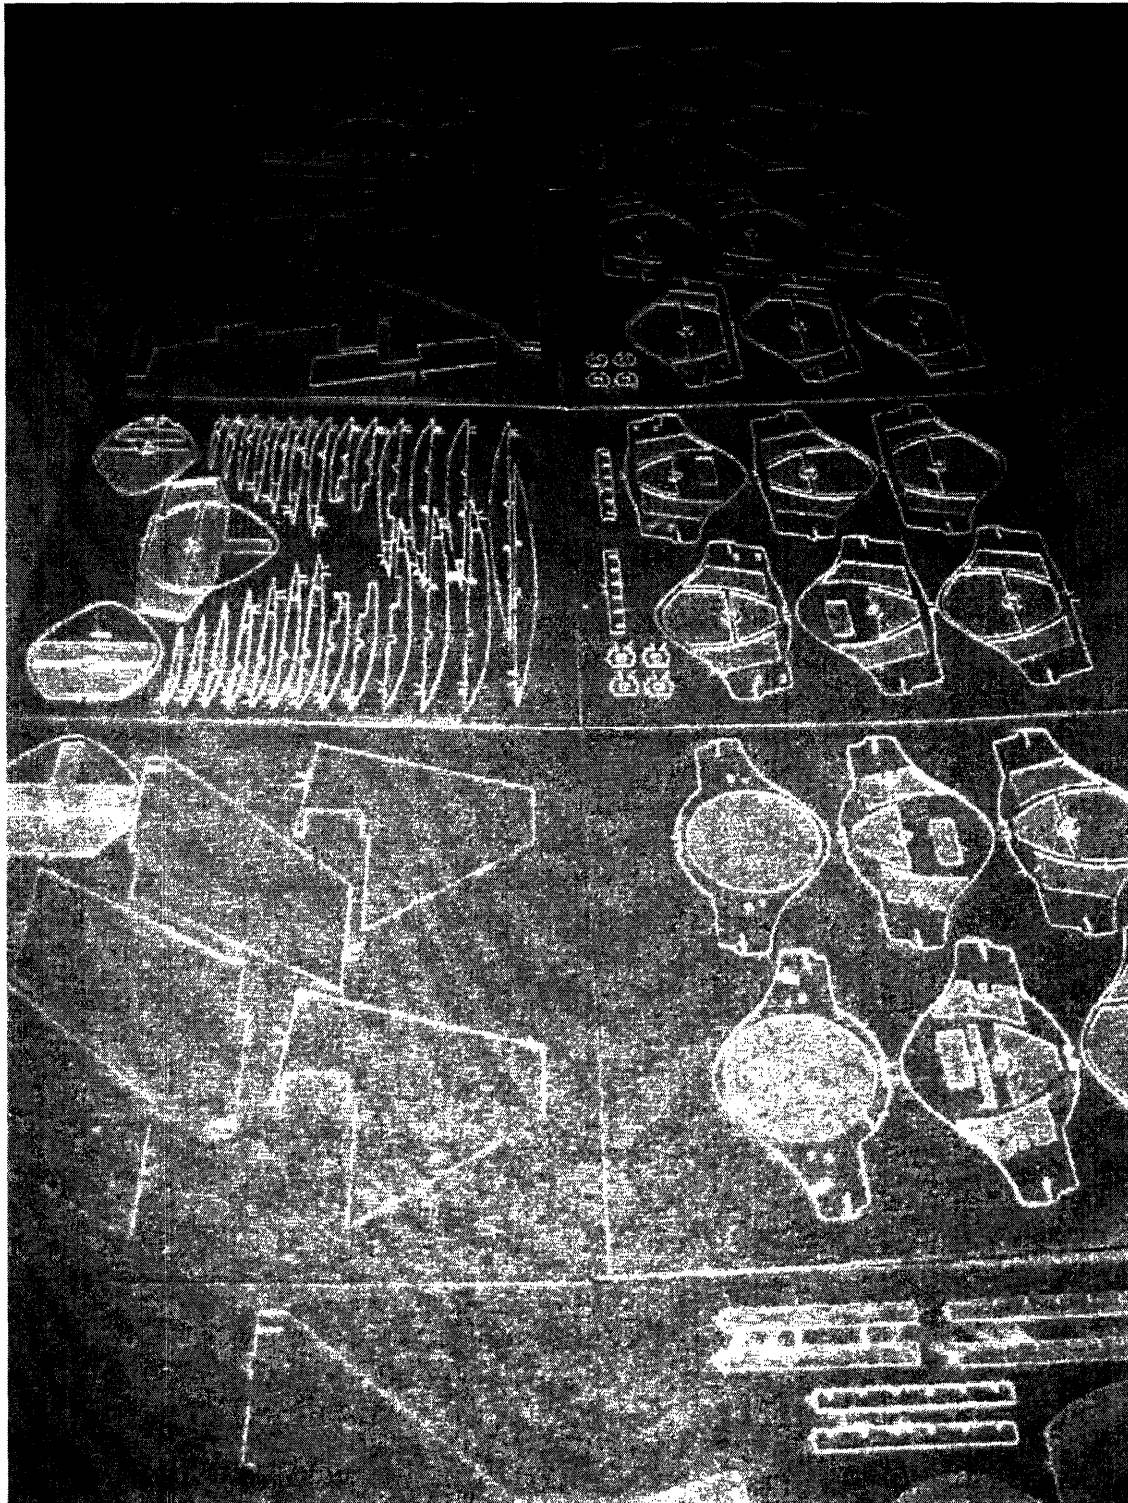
Assembly parts cut out of 12"x12" polycarbonate sheets (1/16" thick) by the waterjet.
